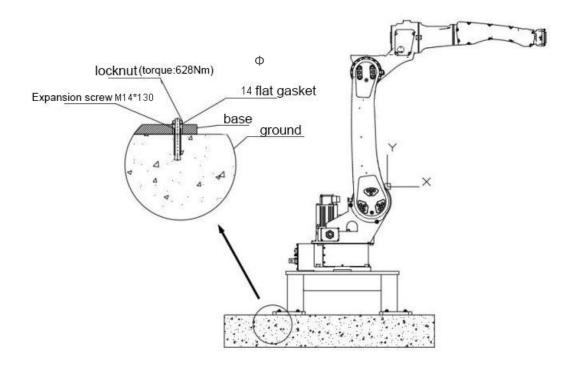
BR-1510/BR-1810/BR-2010 base mounting dimensions
